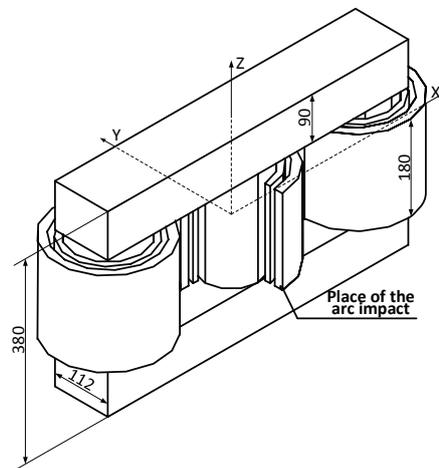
Main dimensions of the investigated autotransformer (in mm)
